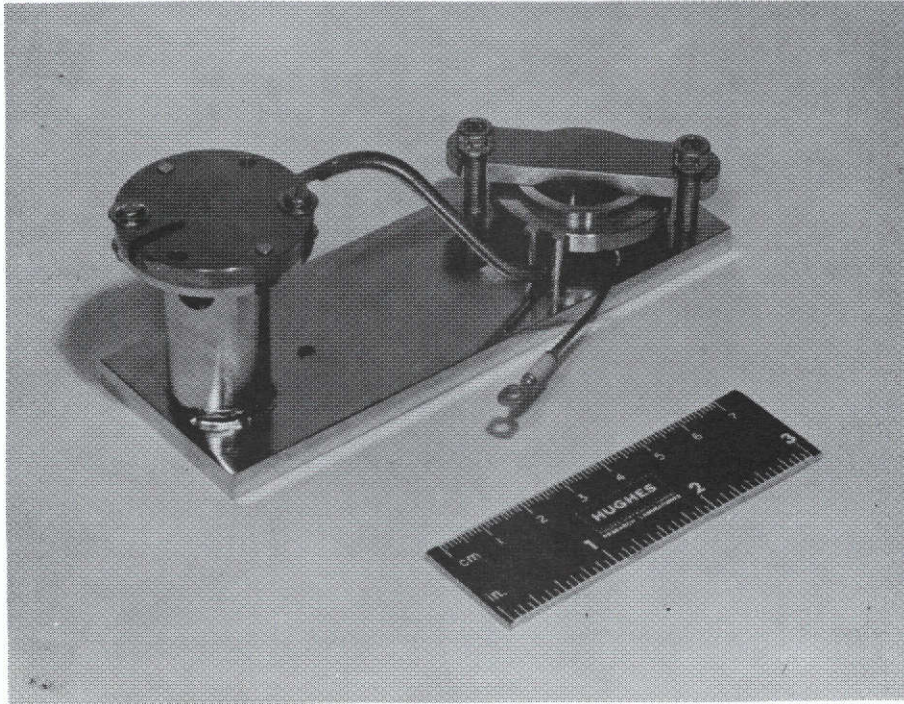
CIV feed tube and cathode flange brazing fixture.
